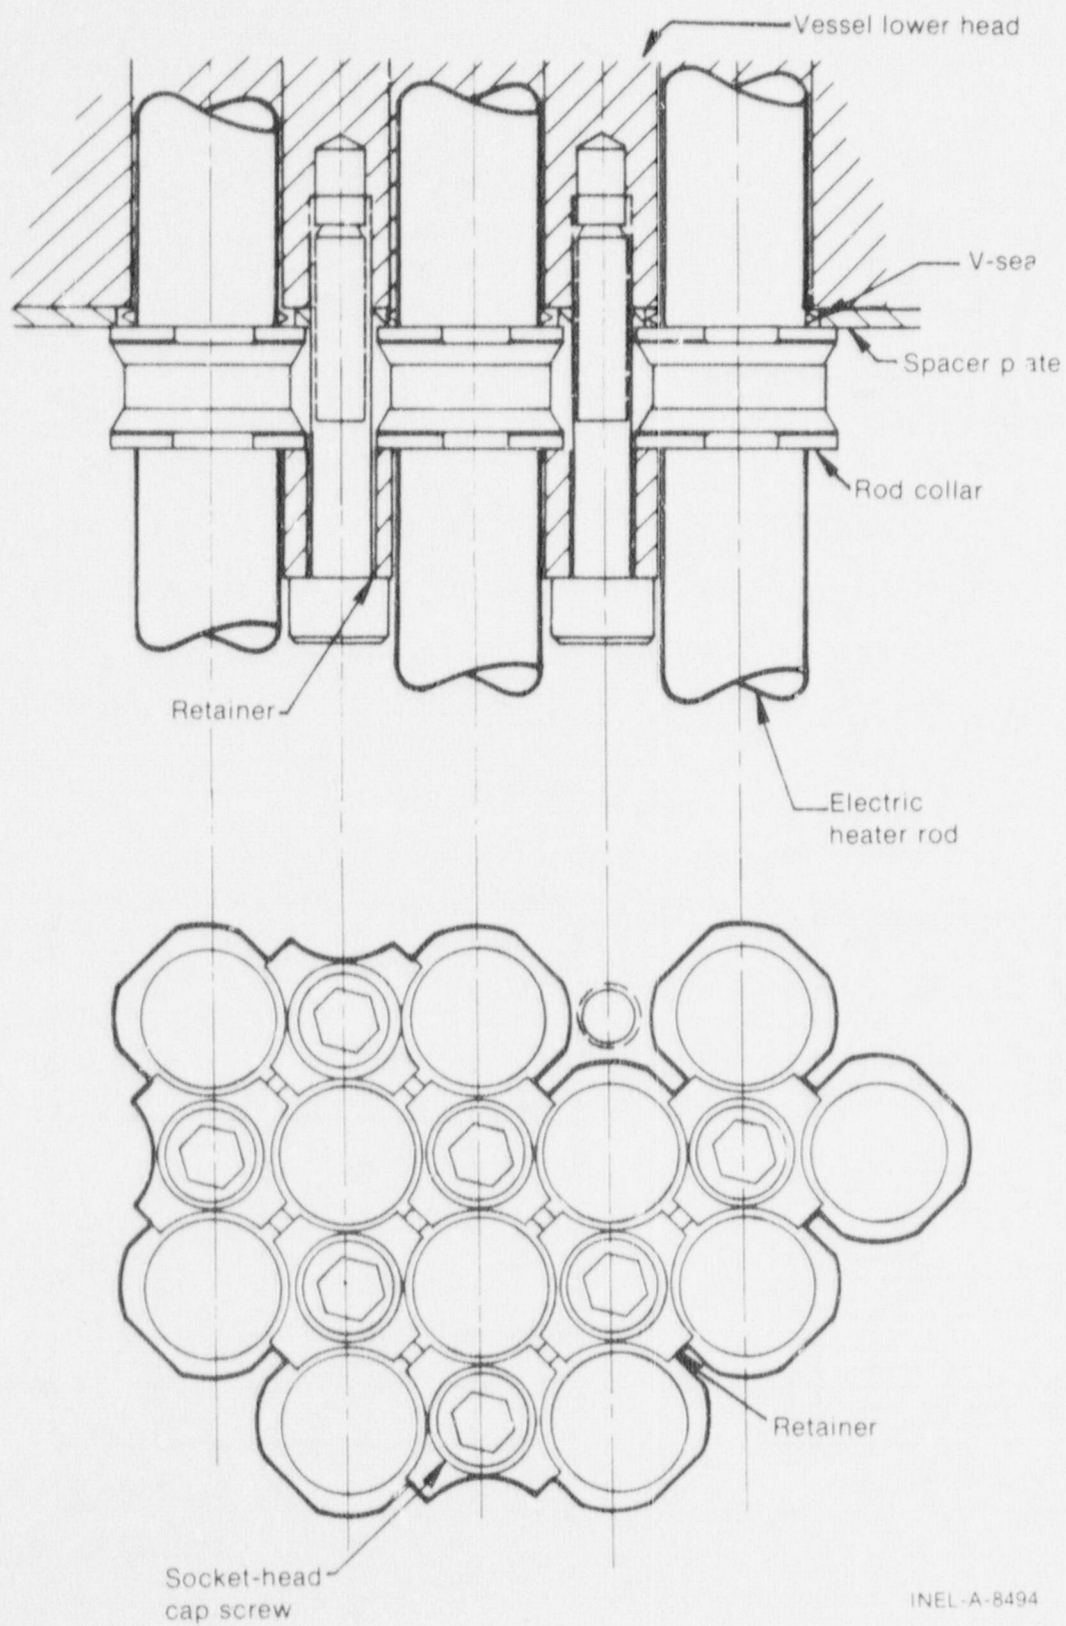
Heater rod mounting and pressure seal in vessel lower head.
